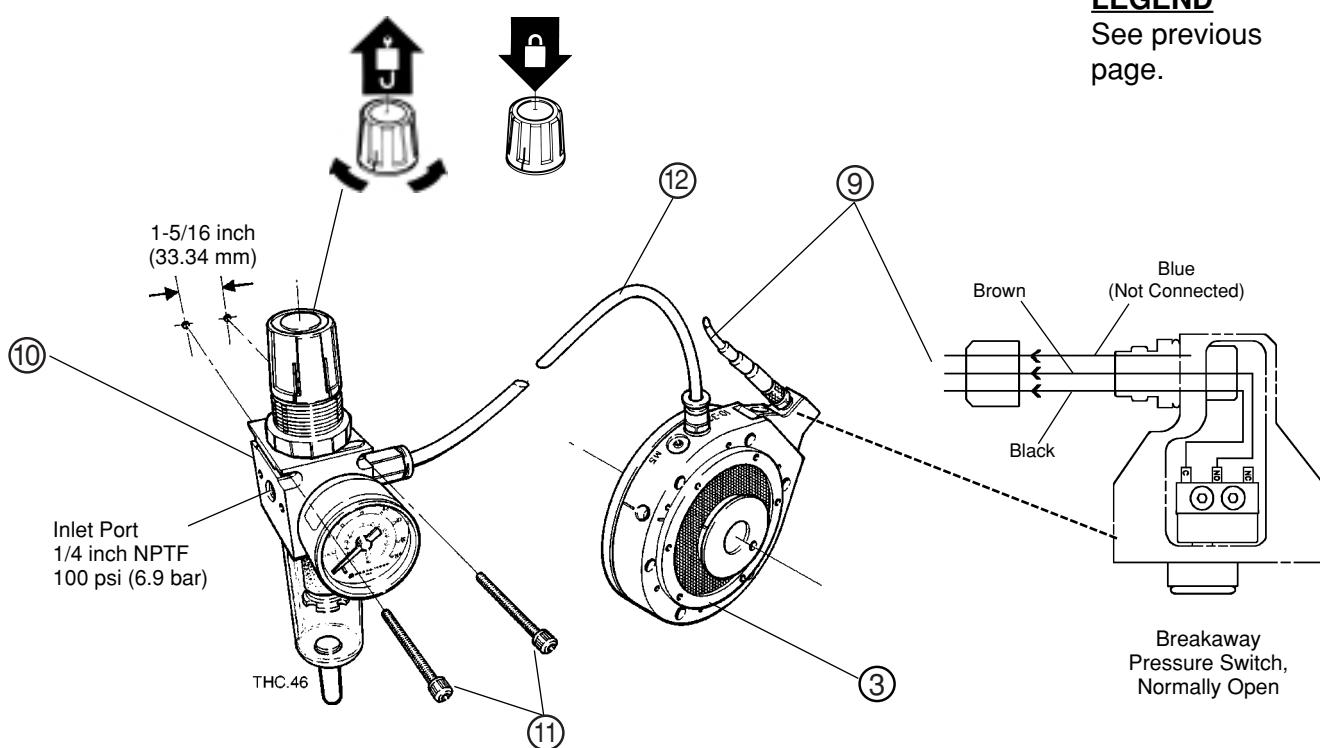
Robotic lifter torch breakaway kit mounting details (1 of 2)
